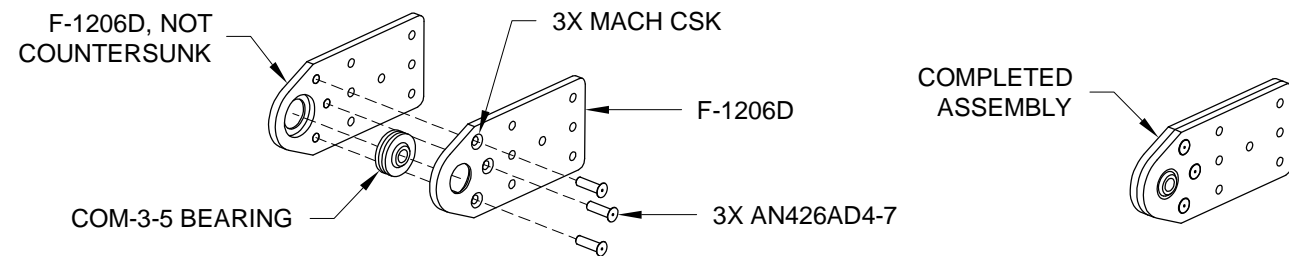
RIVETING BEARING BRACKET ASSEMBLIES
